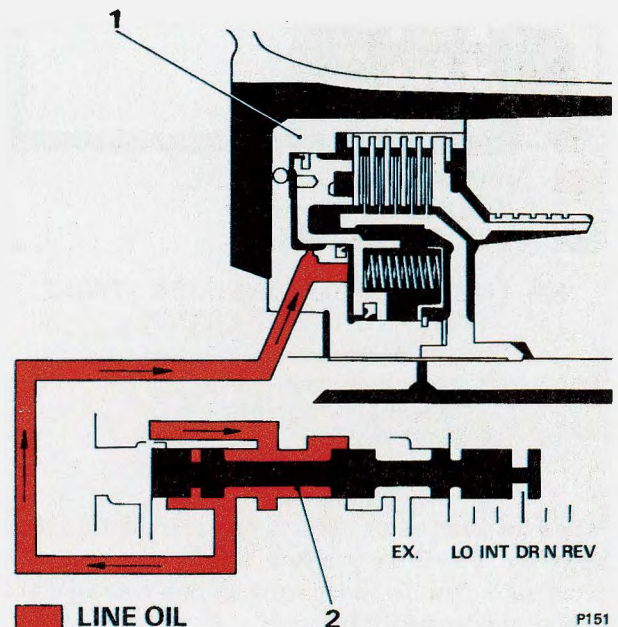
MANUAL VALVE AND FORWARD CLUTCH
